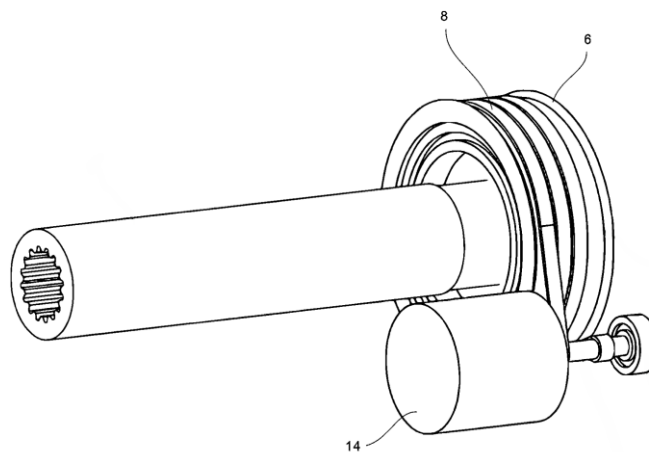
Schaeffler Technologies Ag (DE102023119175A1) showing the brake band design. Espacenet (2025).
